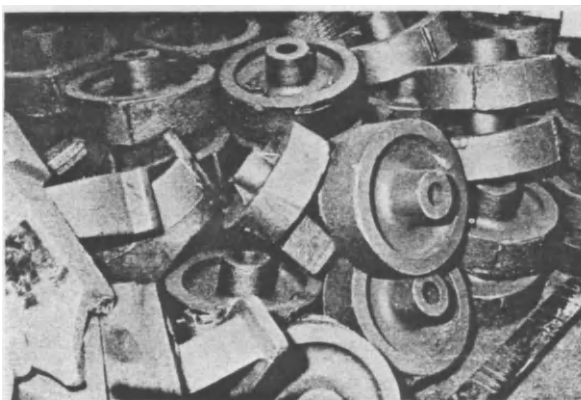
Gear wheel with exothermic pads, ultrasonically sound.
